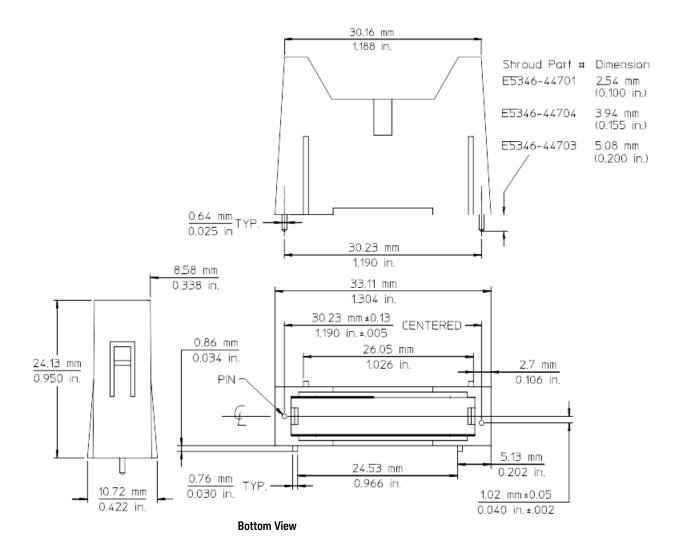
Support shroud dimensions for the U4205A's MICTOR 38-pin connector
